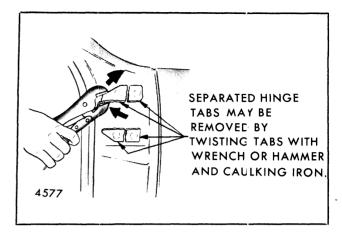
Body Side Hinge Strap Removal - "X" Styles
